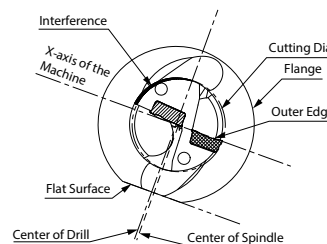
Excessive Offset (For Smaller Hole Diameter)
